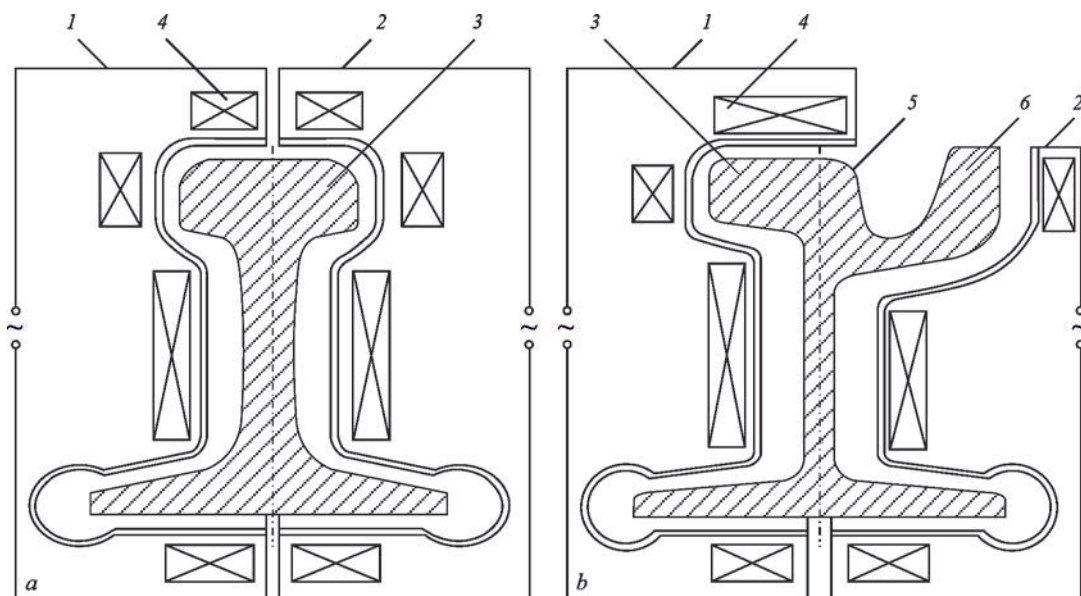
Scheme of heating devices for heat treatment of welded butt joints of railway (*a*) and tram grooved (*b*) rails (description 1–6 see in the text)
